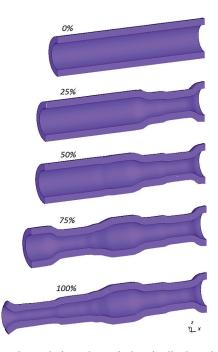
Changes in workpiece shape (in longitudinal section) in skew rolling process
